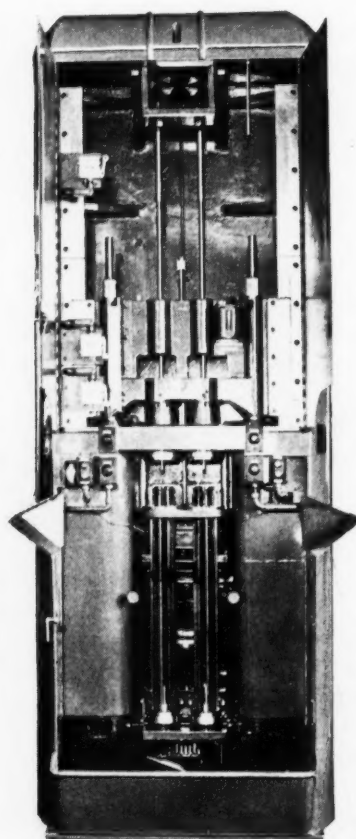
Front View of Machine with Splash Doors Open and Broaches in Starting Position
